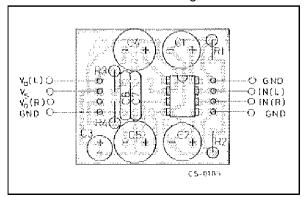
P.C. Board and Components Layout of the Circuit of Figure 2
